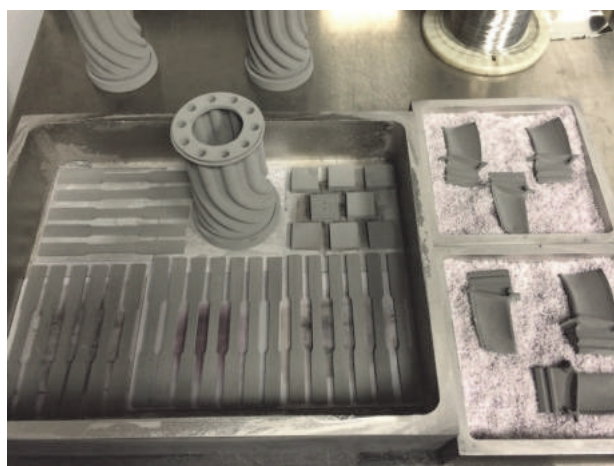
BJP-printed engine blades and other titanium alloy test pieces.
